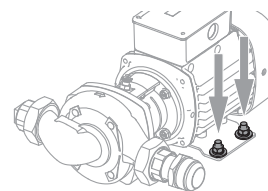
Coolant pump assembly showing .40 inch (10 mm) × 4 diameter mounting holes.
